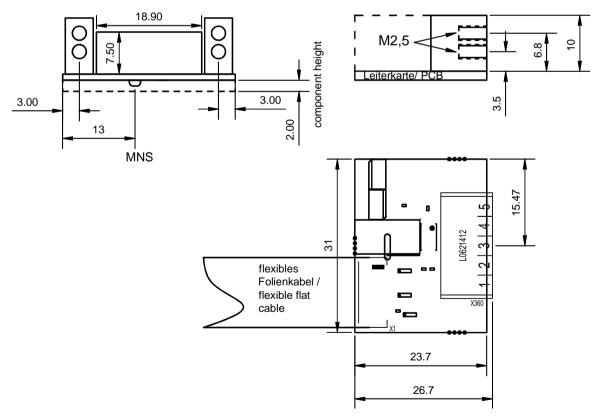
Dimensioning DeviceNet Assembly Interface (AIFX-DN)
